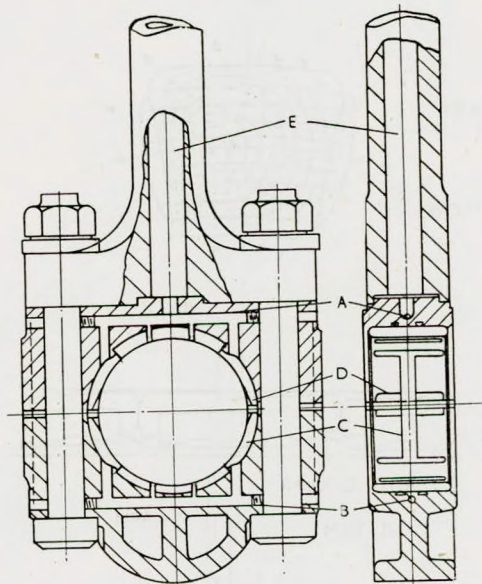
Crankpin brasses (Burmeister and Wain patented construction)
